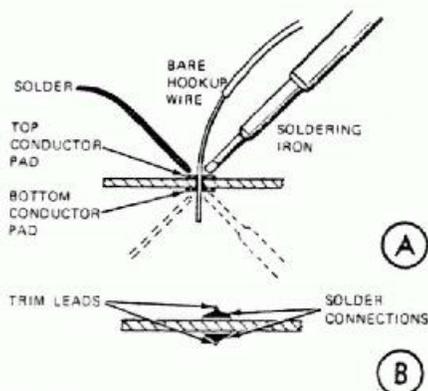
Installing a jumper wire on the M3 circuit board. (A) soldering the jumper, and (B) the completed connection.
